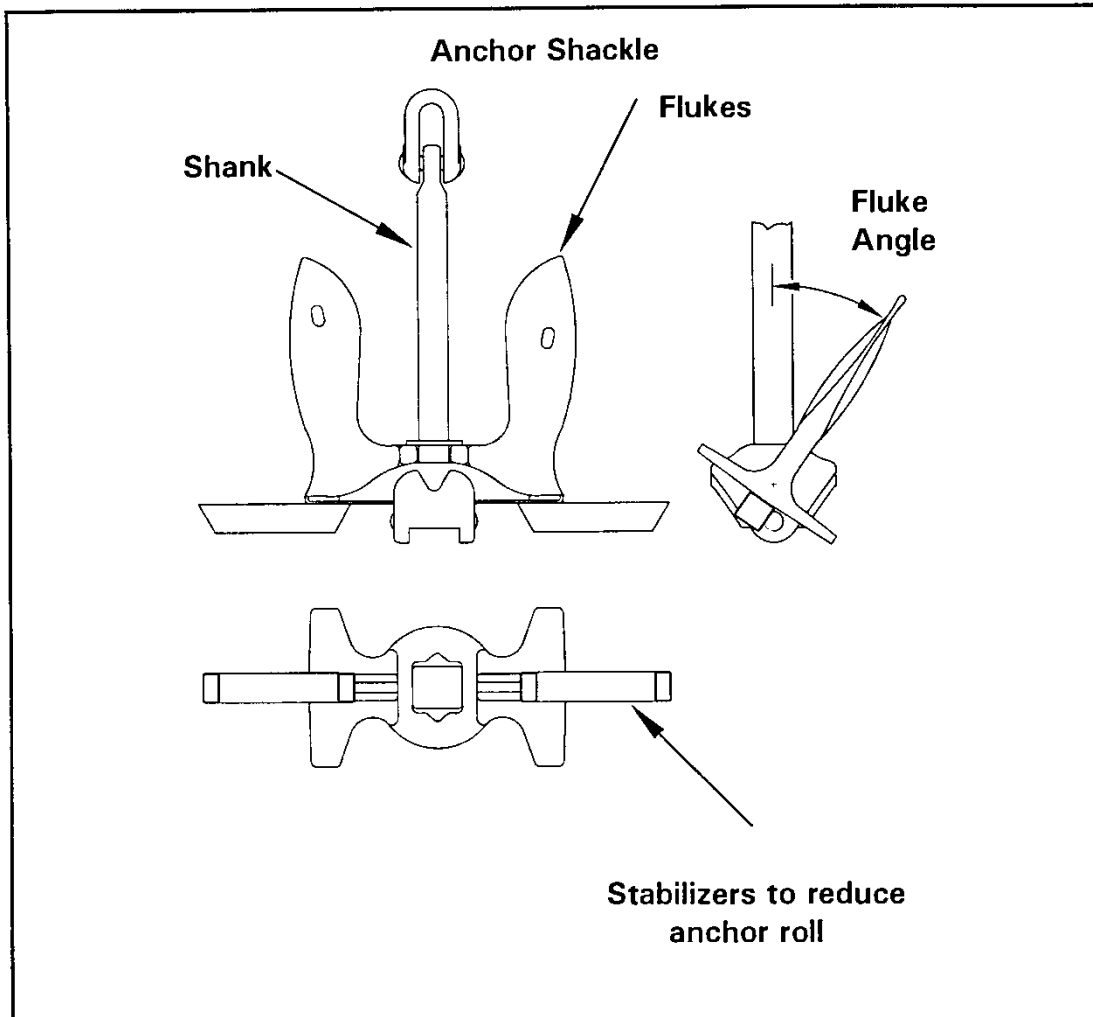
Example of a Drag-Embedment Anchor (NAVMOOR Anchor)
